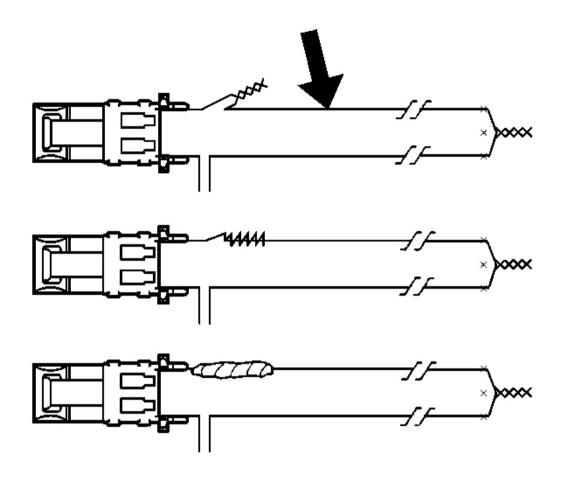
Identifying Twisted Connection Courtesy of GENERAL MOTORS CORP.
